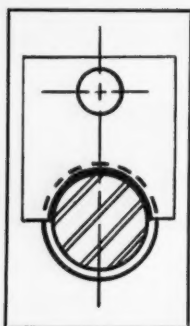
The spring steel retainer shown in this sketch has a semi-circular opening which fits over the screw body and half its circumference with a small clearance.
